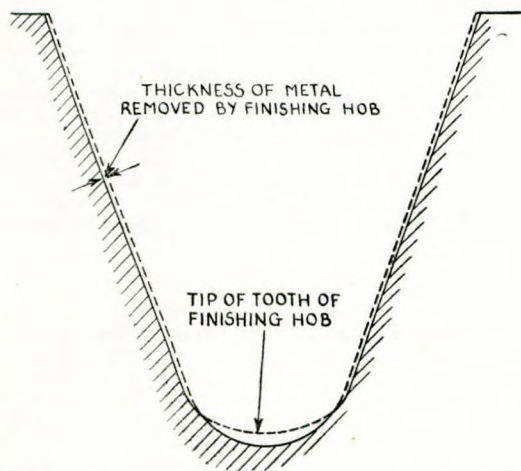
Tooth-forms produced in large gears by roughing and finishing hobs
